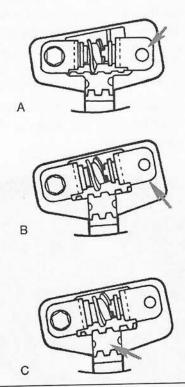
Steps in making a clutch adjustment on an older, self-adjusting clutch equipped with a wear compensator. (Courtesy of Haldex Brake Products, Inc.)
